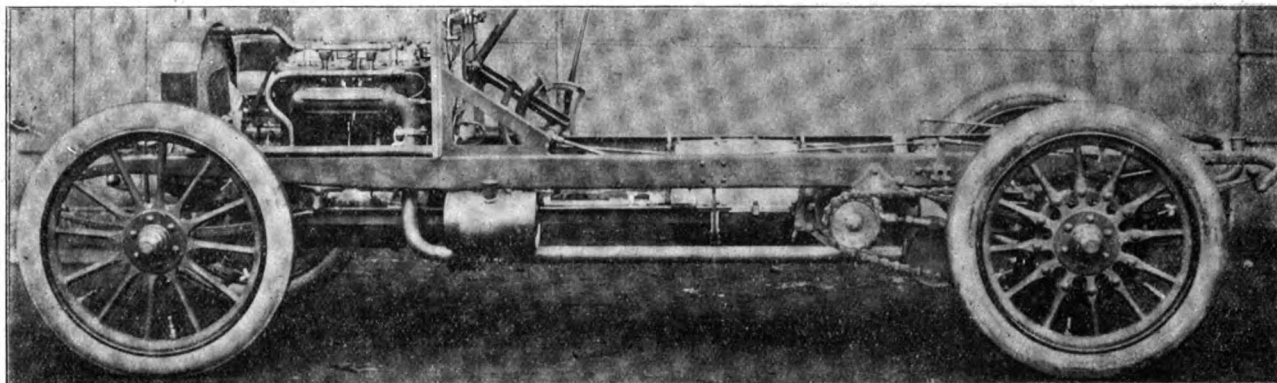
Chassis of the Automoto 18-24-h.p. Car.
